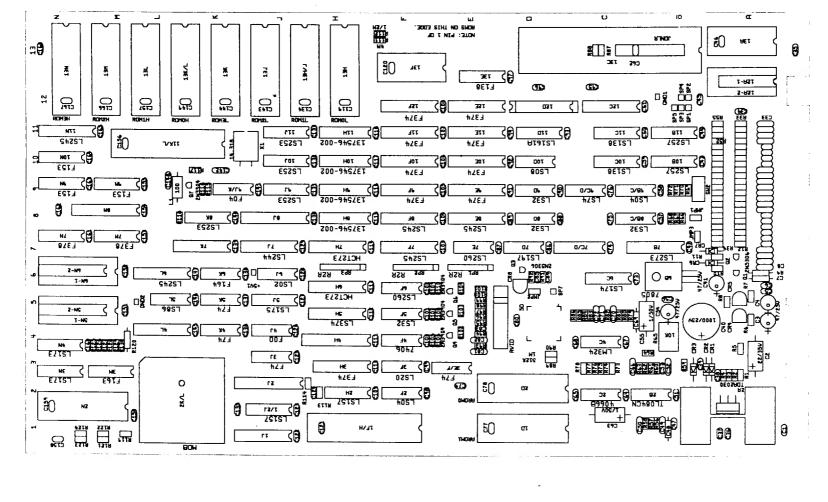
Rampart Game PCB Assembly (3-Player Version) A048868-01 D
